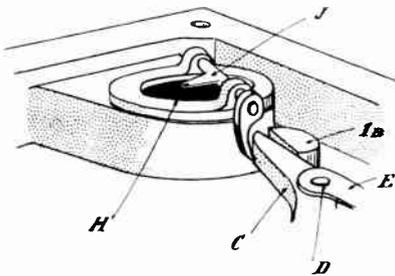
DETAIL SKETCH SHOWING THE DIAPHRAGM OPERATED BY THE ENGINE DRIVER'S RESPONSE OR ACKNOWLEDGING PLUNGER. The rocker shaft and arm resets the commutator C, bringing it back to the pole piece IB.
